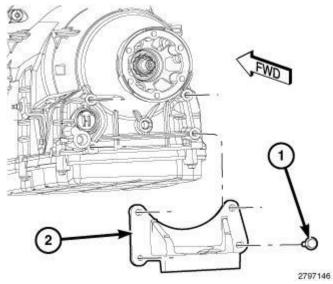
Rear Engine Mount Bracket & Bolts (4x2) Courtesy of CHRYSLER GROUP, LLC
